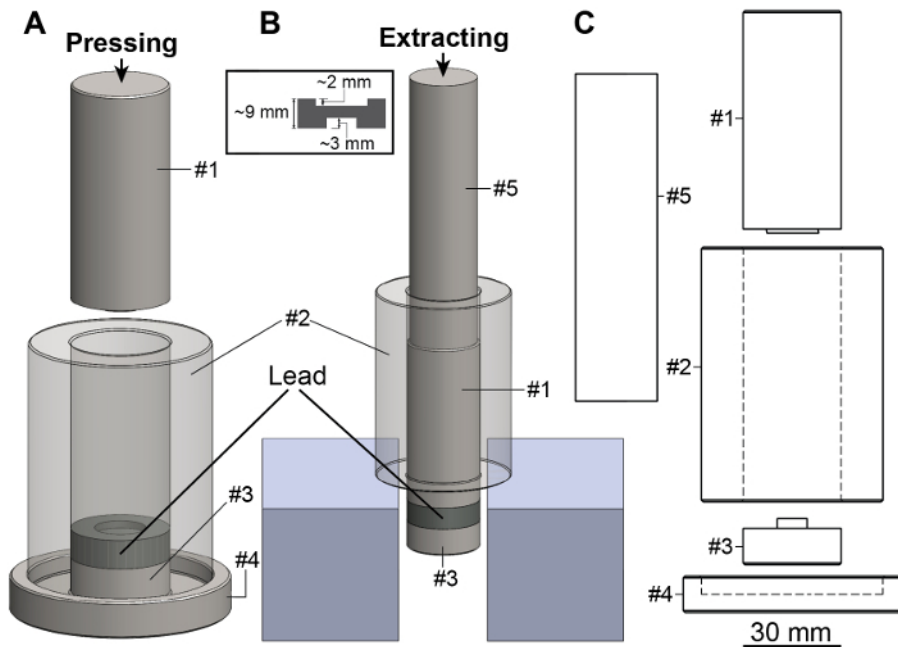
Tool required to produce the lead piece. A) 3D view during pressing (4 tons for 30 s) of the molten lead (50 g). The component #2 is shown in transparency. B) 3D view during extraction of the lead piece (the dimensions are shown in the top left inset). C) Scaled drawings of the tool components. [Please click here to view a larger version of this figure.](#)
